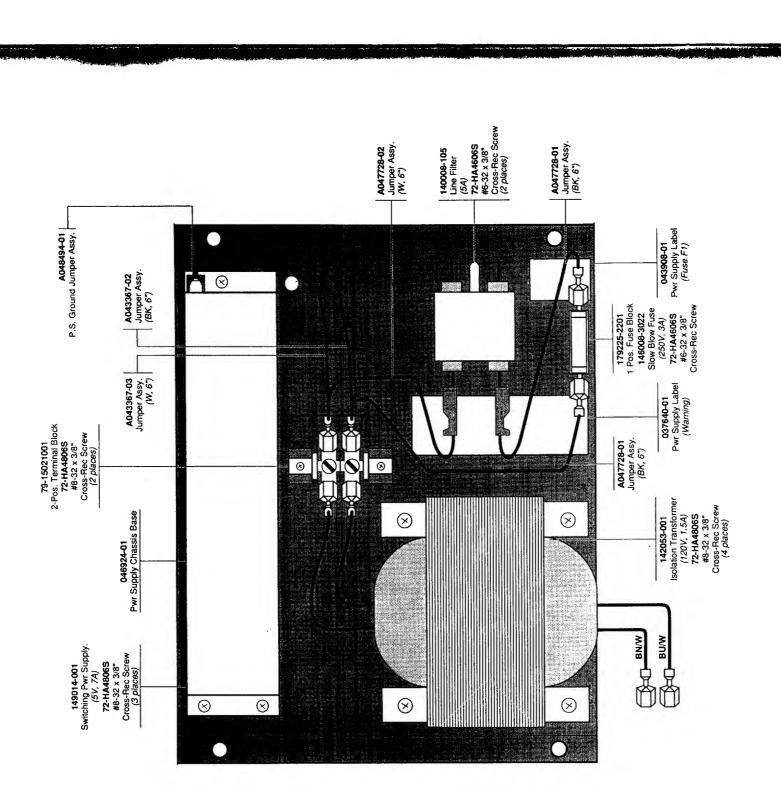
JAMMA Power Supply Assembly A047606-03 E
